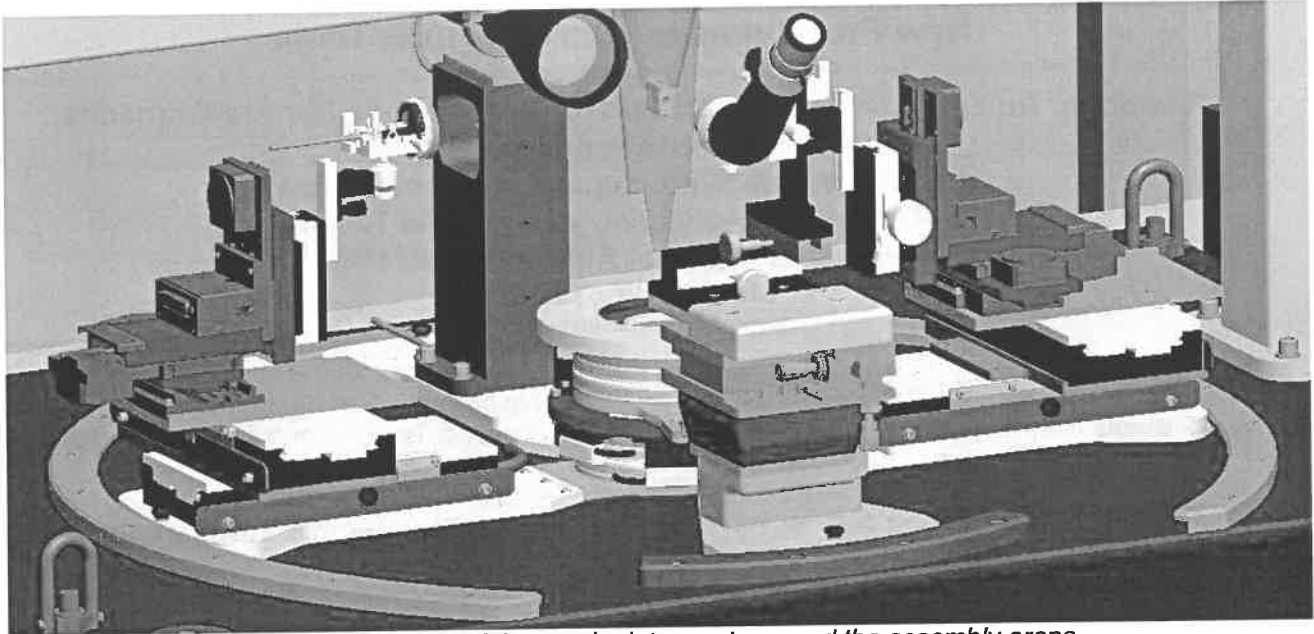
Model showing a close-up of the manipulator systems and the assembly arena.
